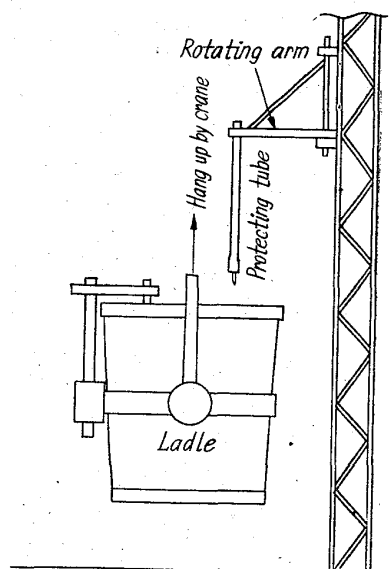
Layout of quick immersion pyrometry of molten steel in a ladle.
